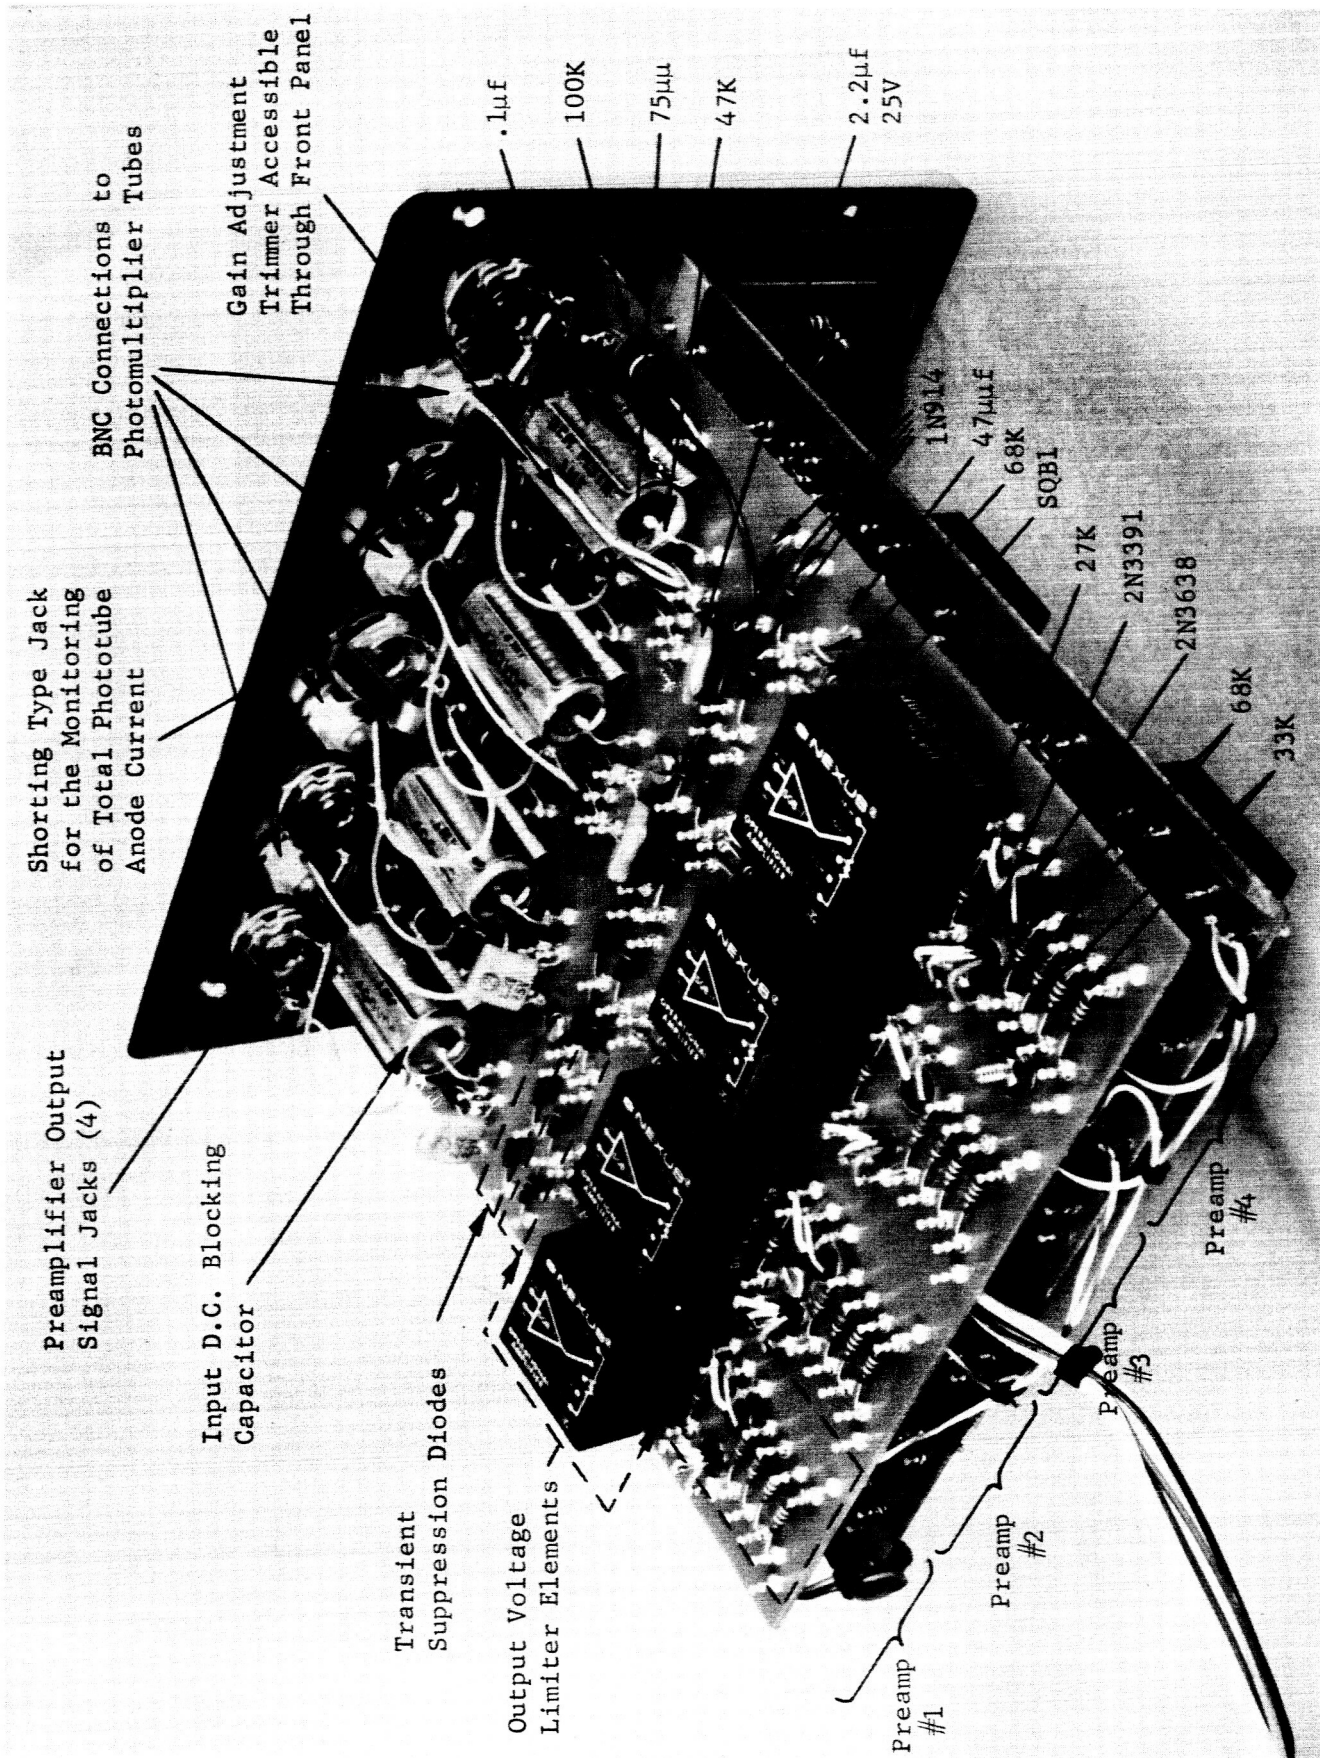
Electronics Package with Cover Removed, Bottom View
